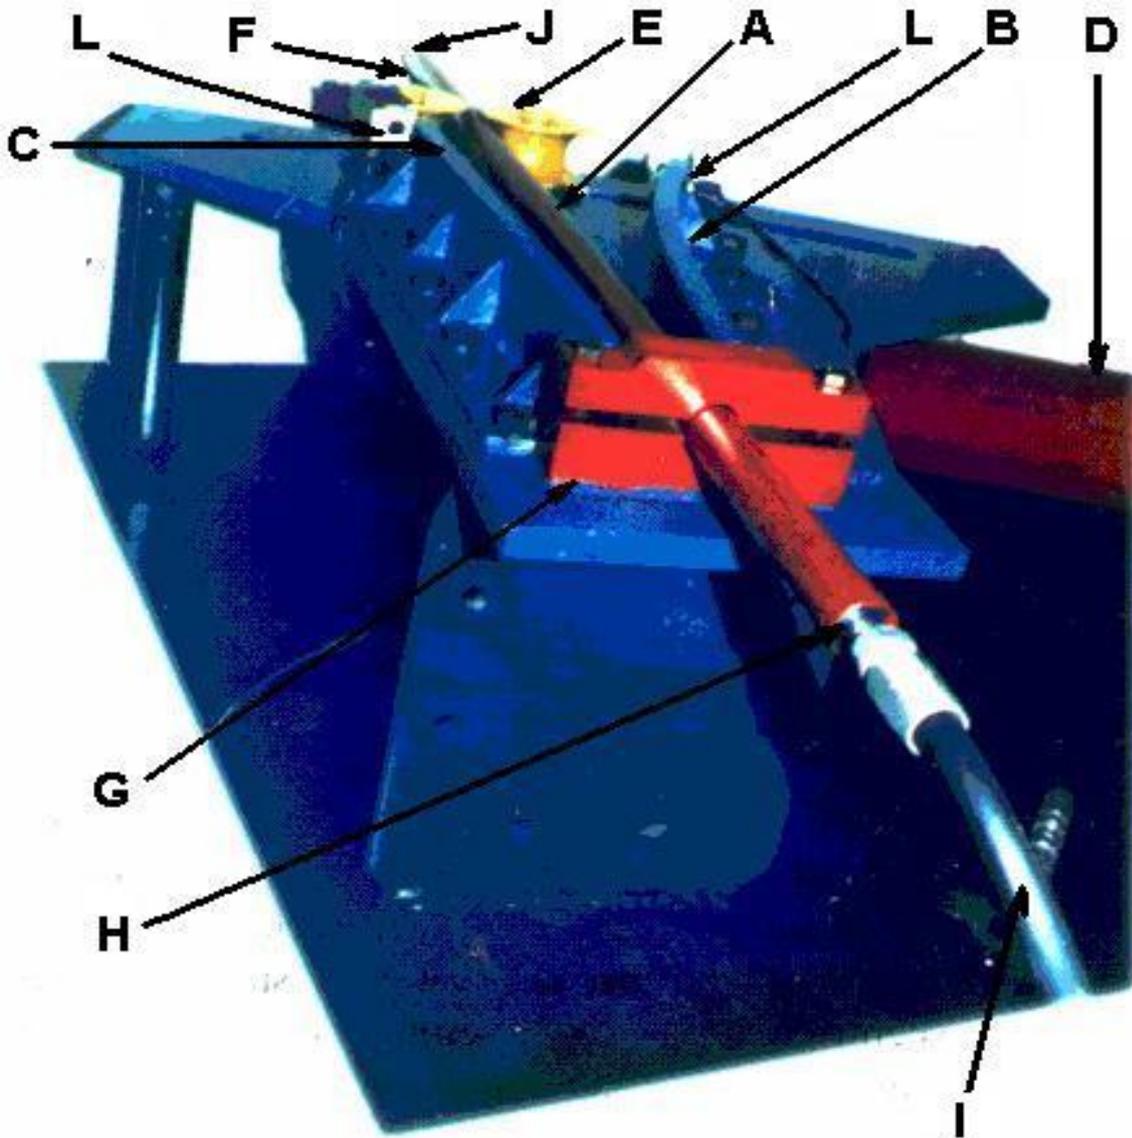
The general view of the stand: A – hot-rolled pipe; B – bending form; C – straight form; D – hydraulic linear engine; E – profiled rollers; F – upper adapter; G – clamp device; H – lower adapter; I – hydraulic connection; J – inferior valve; K – superior valve; L – check piece; M – electric motor
